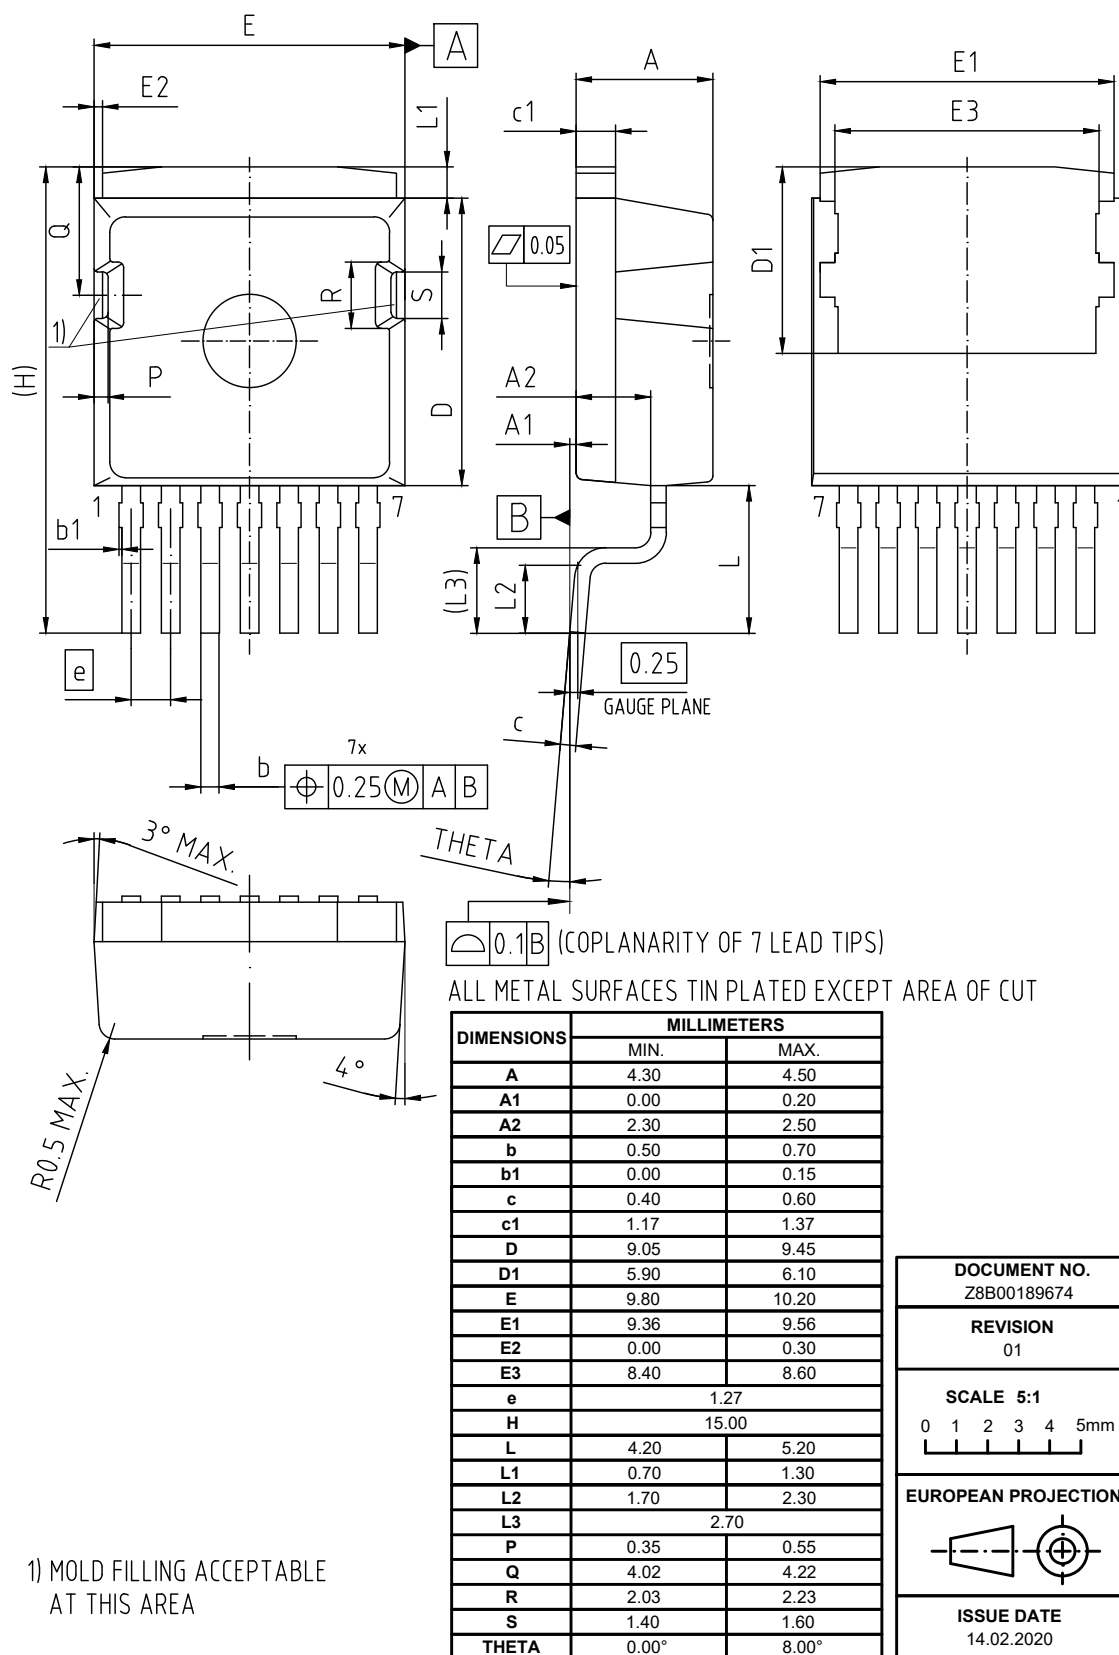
Outline PG-TO263-7-12, dimensions in mm
